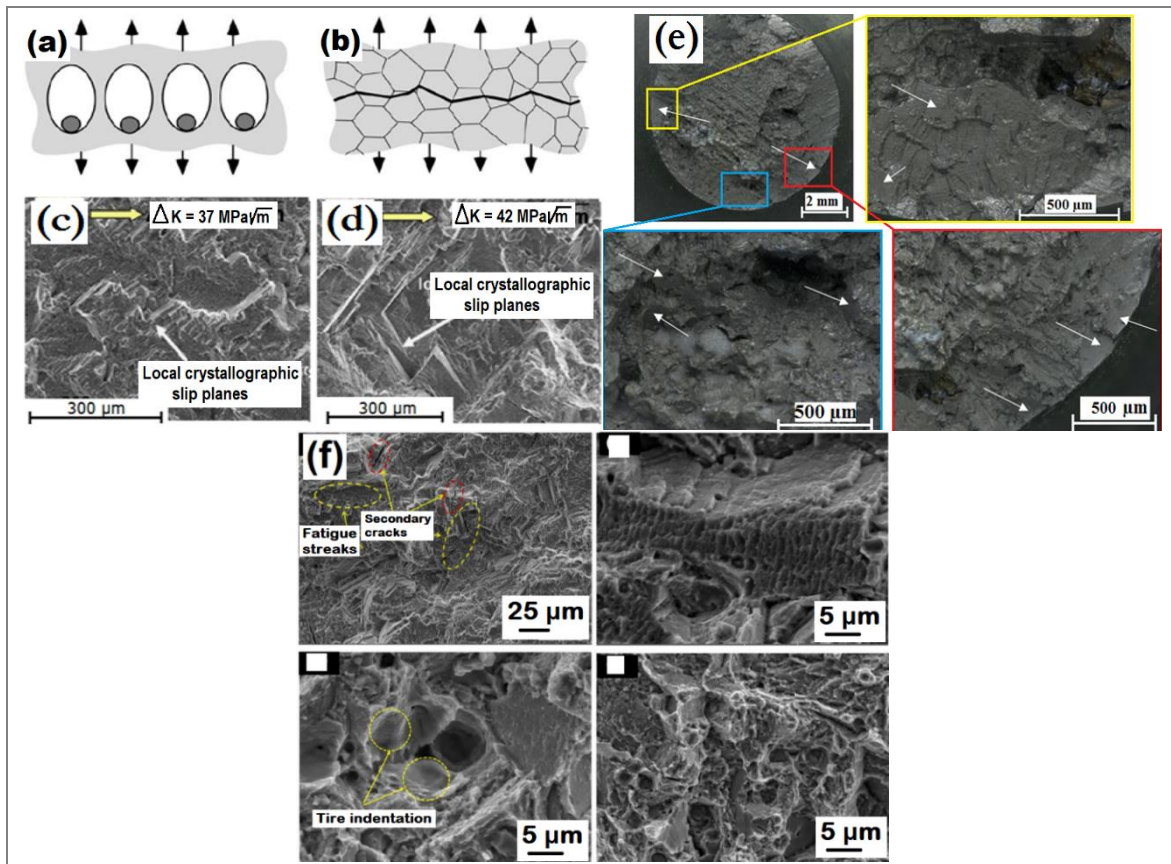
Two micro-mechanisms of fracture in metals and alloys: (a) ductile fracture, (b) cleavage or trans-granular fracture [85]; (c), (d) [41] and (e) Characteristic (SEM) fractographs [32], showing multi-faceted fracture surfaces, reported in a DS nickel-based superalloy, (f) a combination of secondary cracks, cleavages, fatigue stripe, tire indentations and dimples [87]
